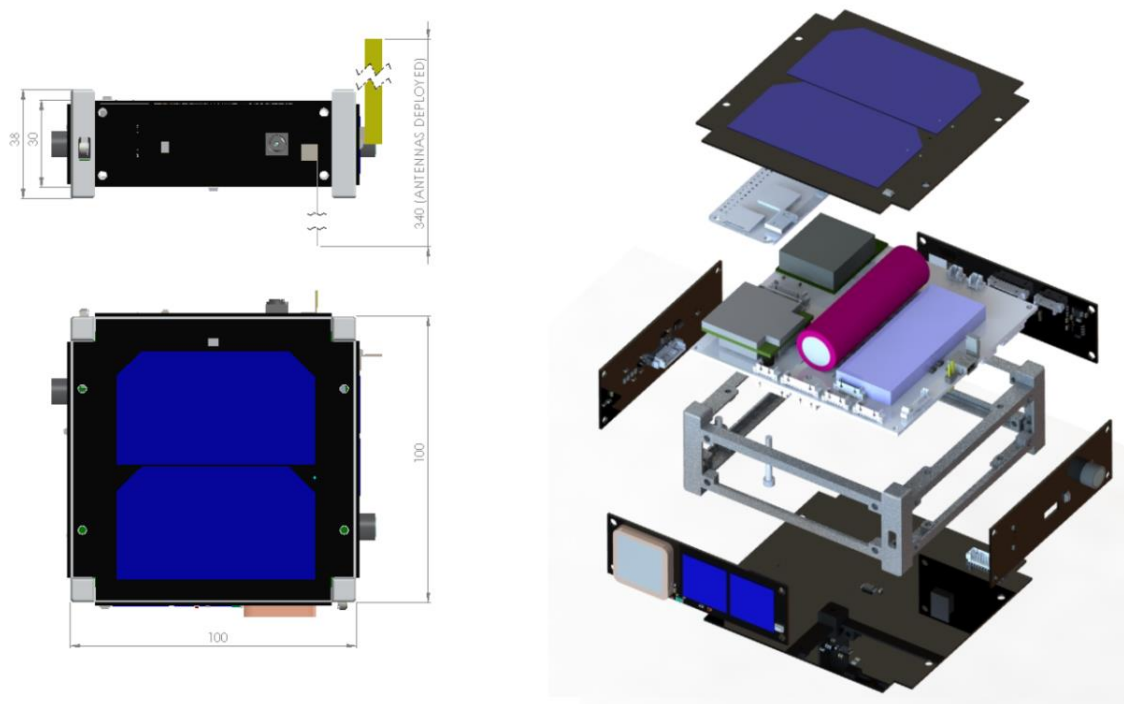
Dimensional drawings (left) and an exploded view drawing (right) of the FEES satellite. The RadEx2 experiment is located on the bottom side of the central PCB. Pictures credit: GP Advanced Projects, Italy.
